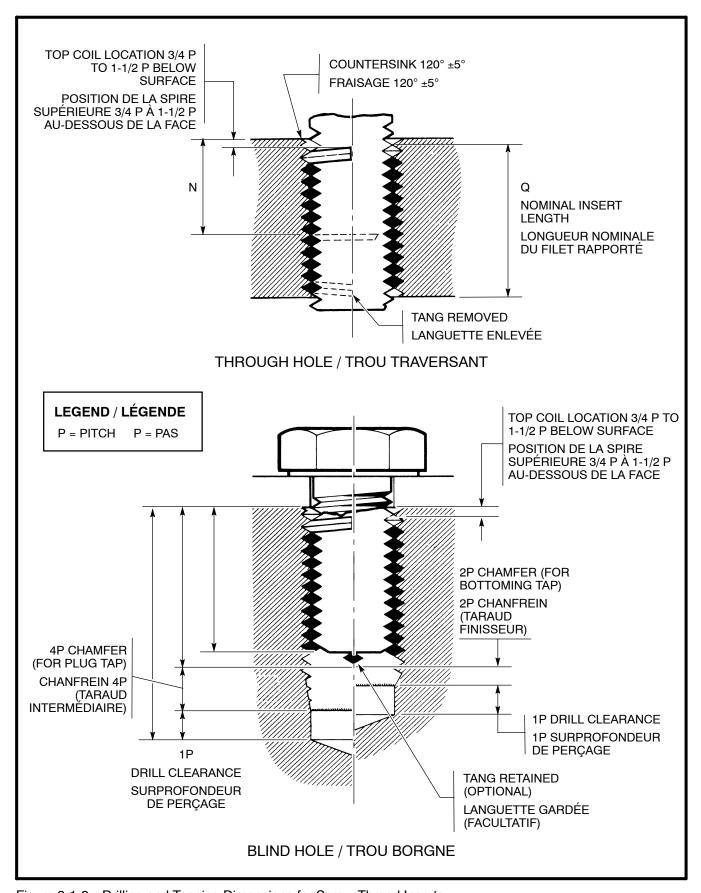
Drilling and Tapping Dimensions for Screw-Thread Inserts
